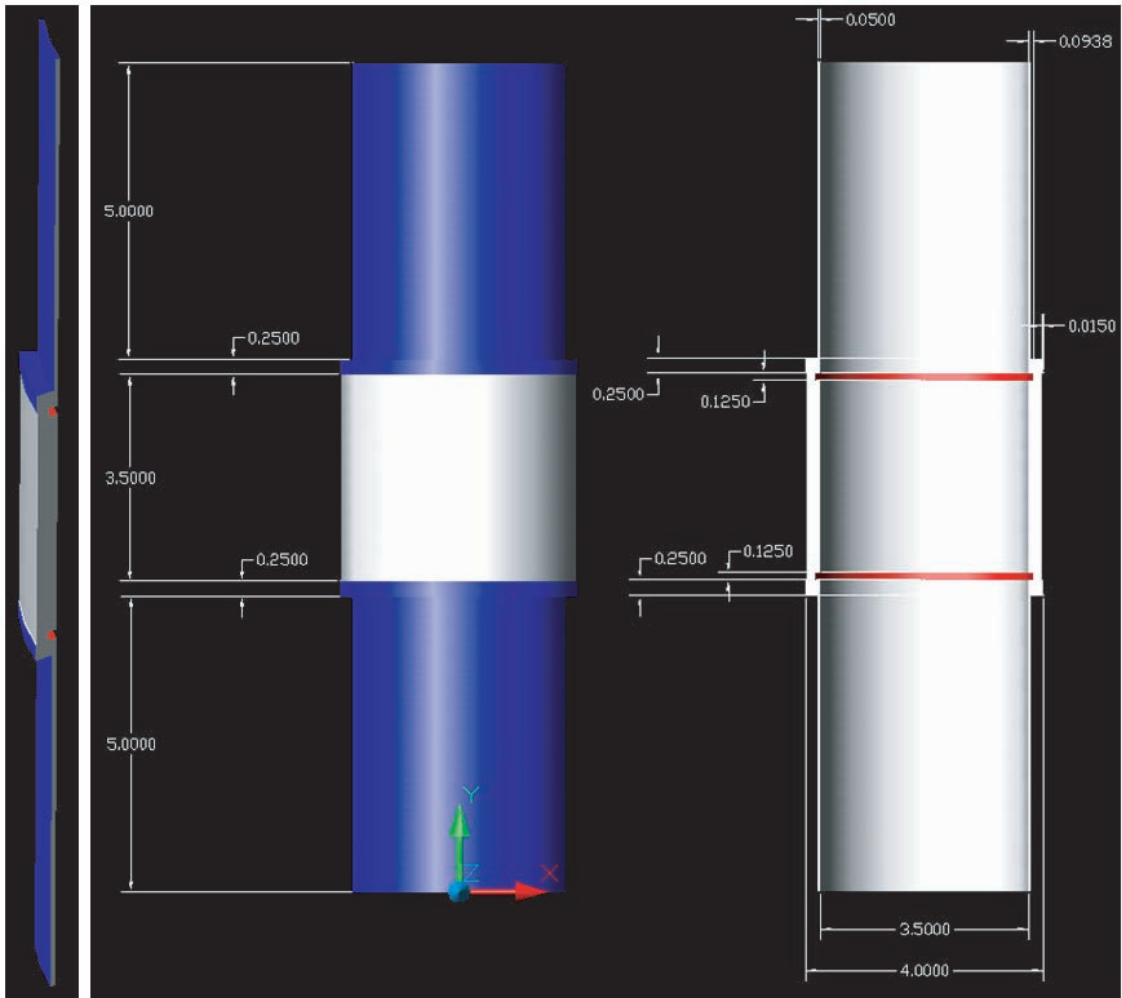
Dimensions of the cylinder, as along with a view of a single cylinder piece.
